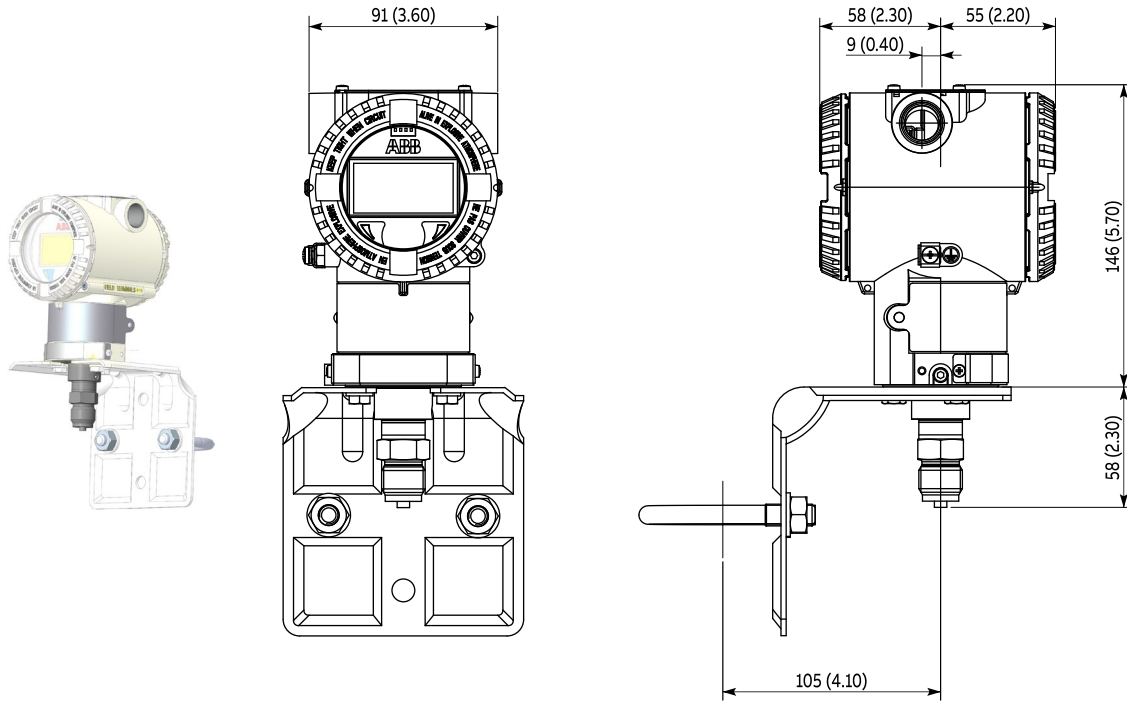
Barrel housing - Process Connection G 1/2 in male with universal mounting bracket for pipe or wall mounting
